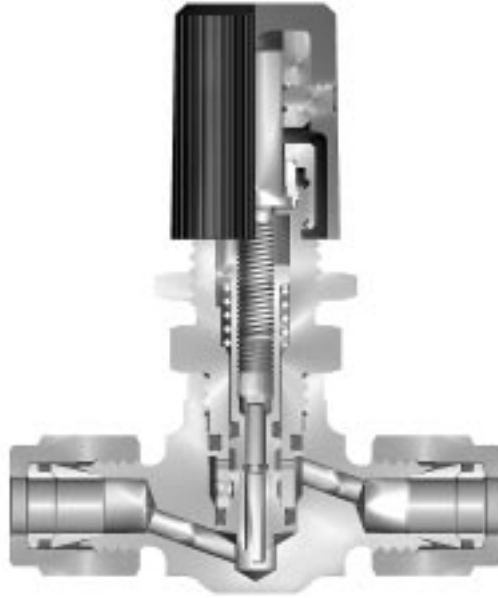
HR Series Metering Valve with Knurled Handle Cross Sectional View
